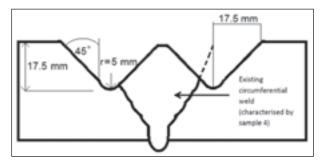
Half thickness groove preparation machined around preexisting circumferential groove weld (sample 3).
